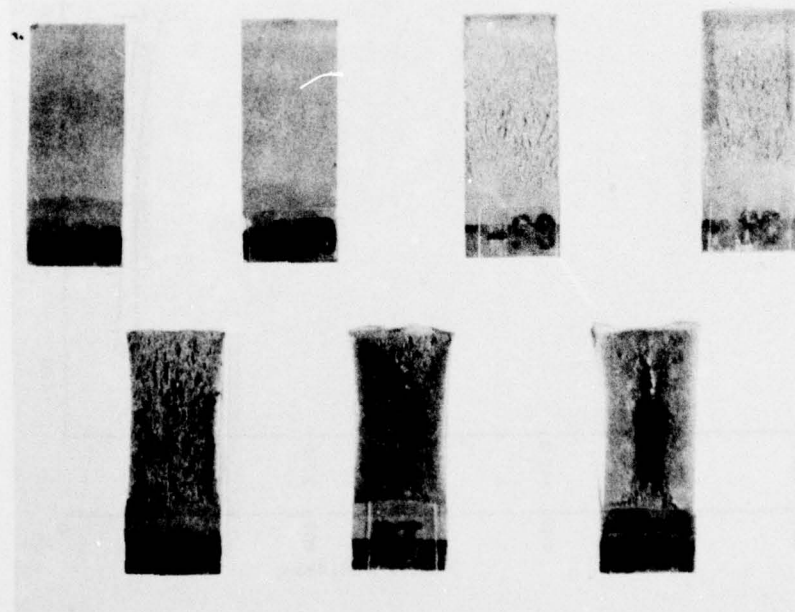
Fracture surfaces of fatigue precracked base plate specimens tested at the temperatures indicated ($^{\circ}\text{C}$); (RW orientation).
